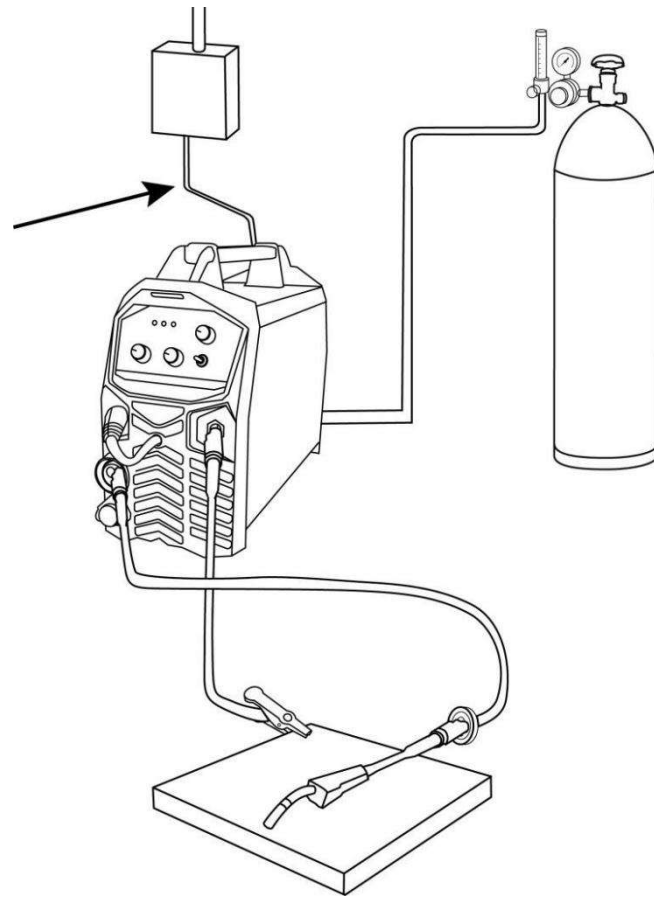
Setup for MIG Welding with Gas Shielded MIG Wire
